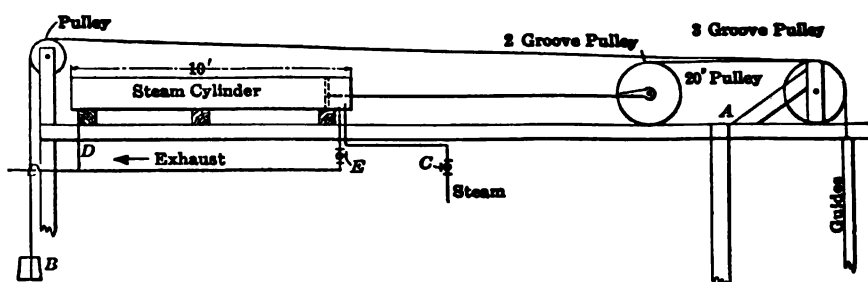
SKETCH SHOWING PISTON ARRANGEMENT FOR COAL LIFT.
